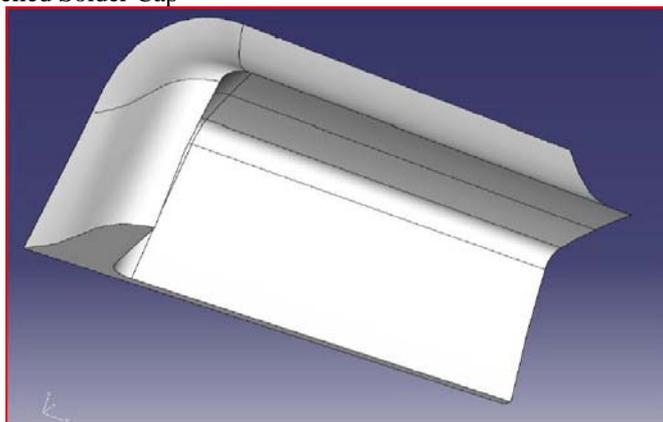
A Typical 0805 Resistor with Solder Joint.
